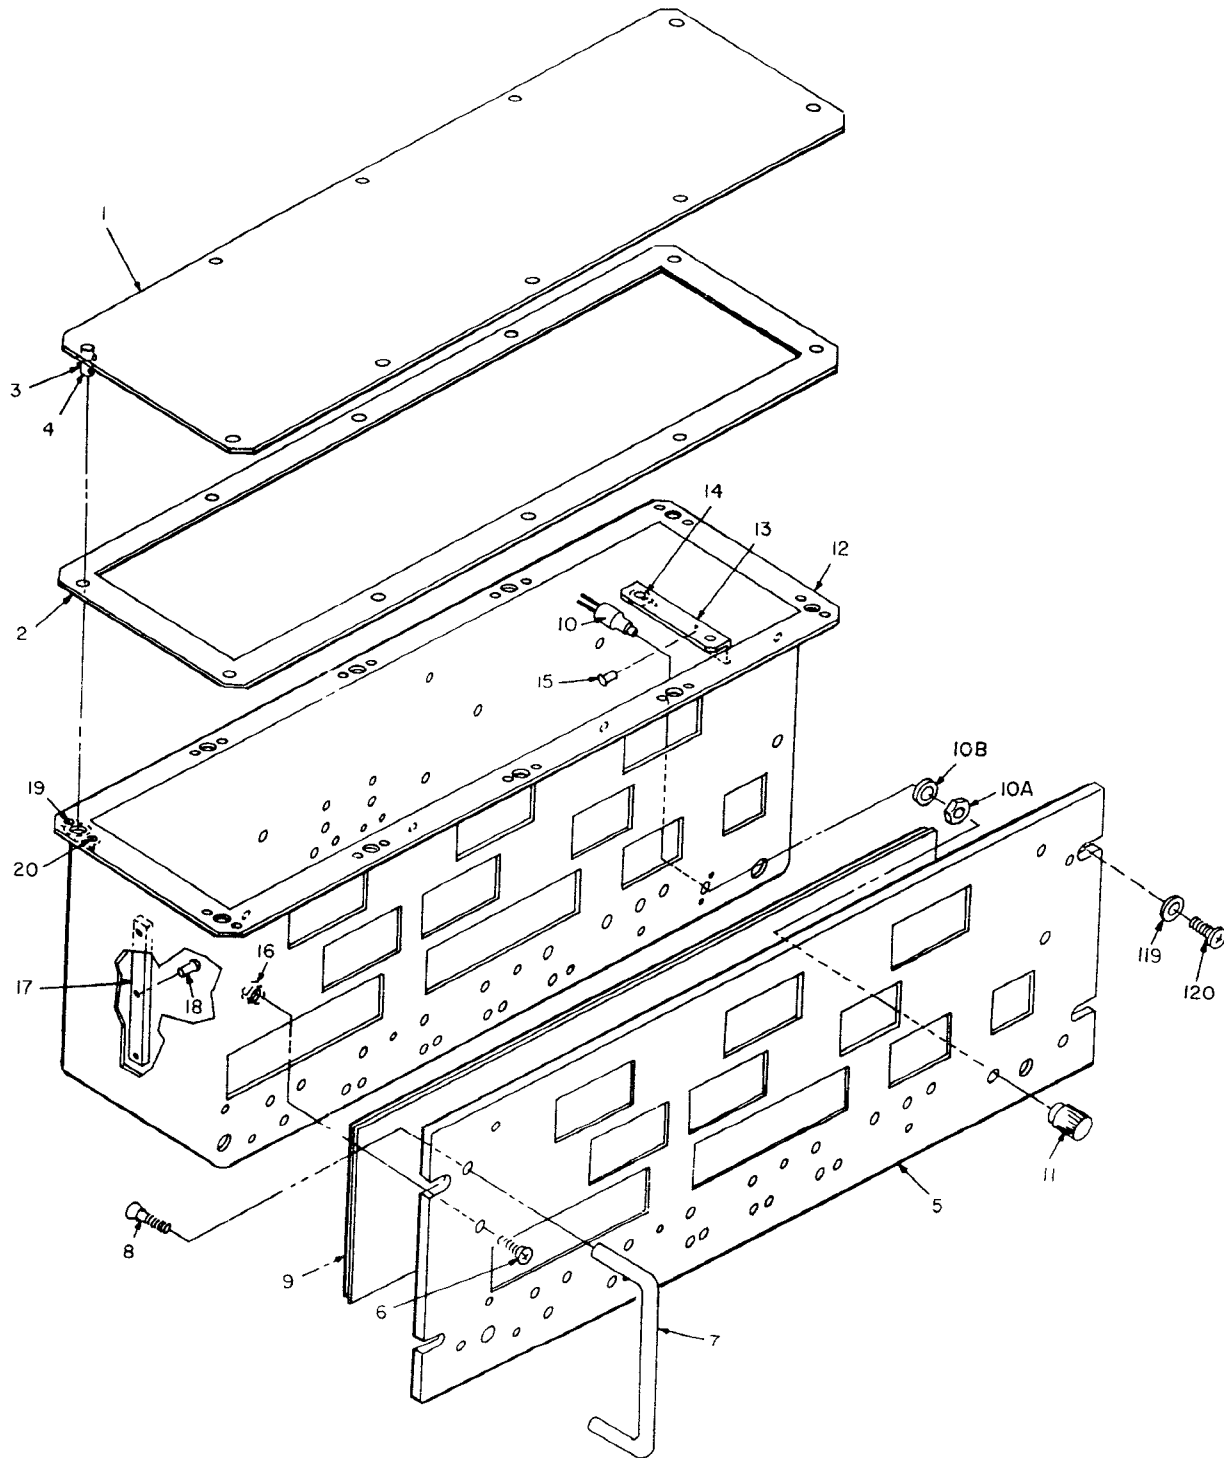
Recorder Assembly (Sheet 1 of 3)
